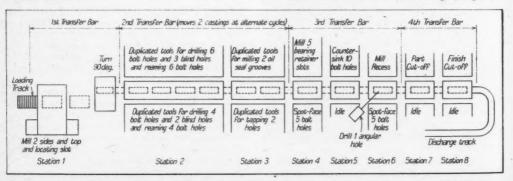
Diagrammatic layout of the Ordzonikidze transfer machine for operations on diesel engine main bearing caps showing the arrangement of the machining stations and the four transfer bars
